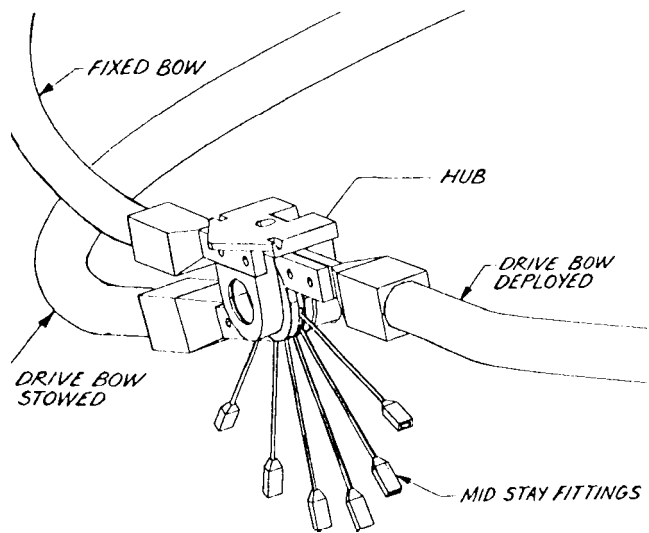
VIEW OF DRIVE MECHANISM FROM BELOW
